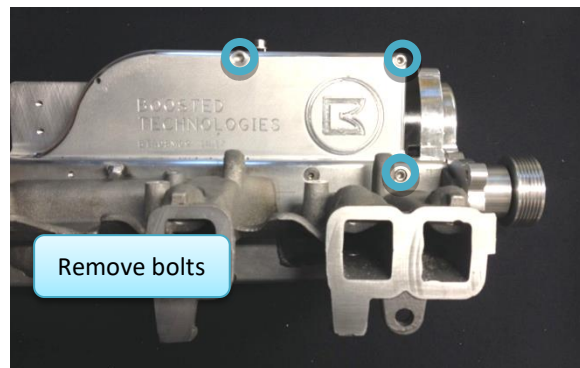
Remove bolts from assembly. Do not remove unmarked bolt in photo.
